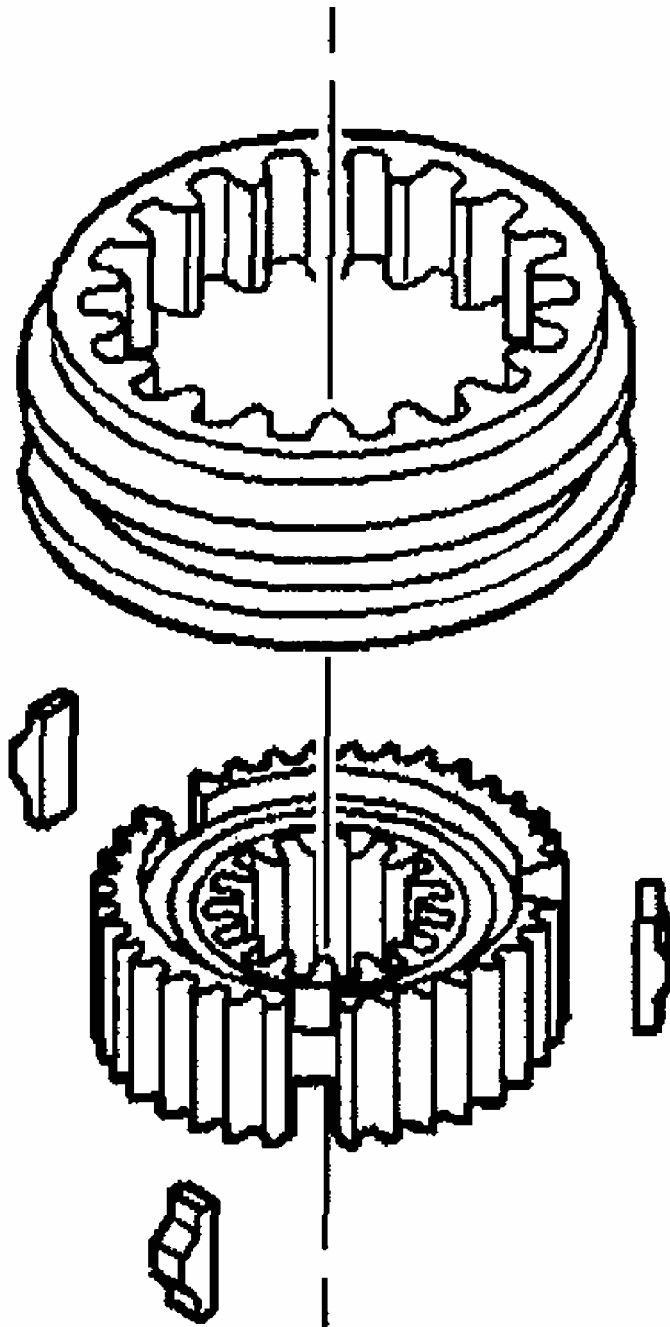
Checking Synchronizer Assembly Scribe Marks
